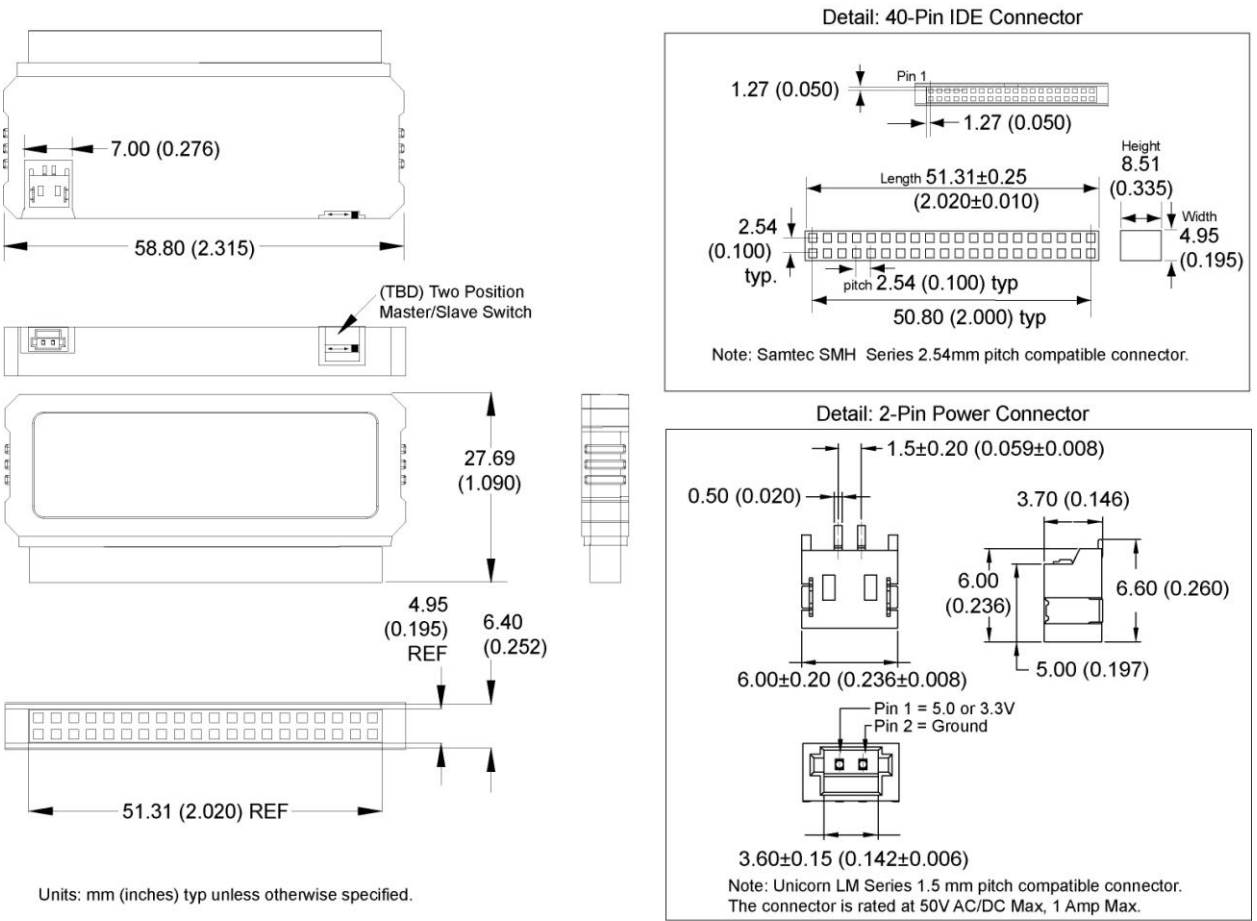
Mechanical dimensions 40-pin vertical plug-in module with housing
